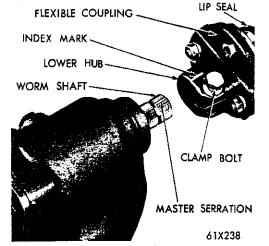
Aligning the Steering Gear with Flexible Coupling
